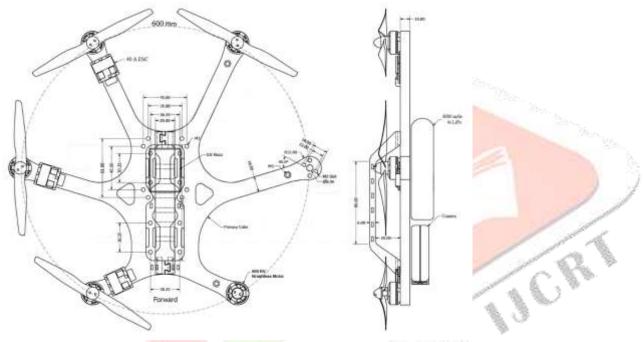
2D drawing of the Hexacopter. Hexacopter working principle
